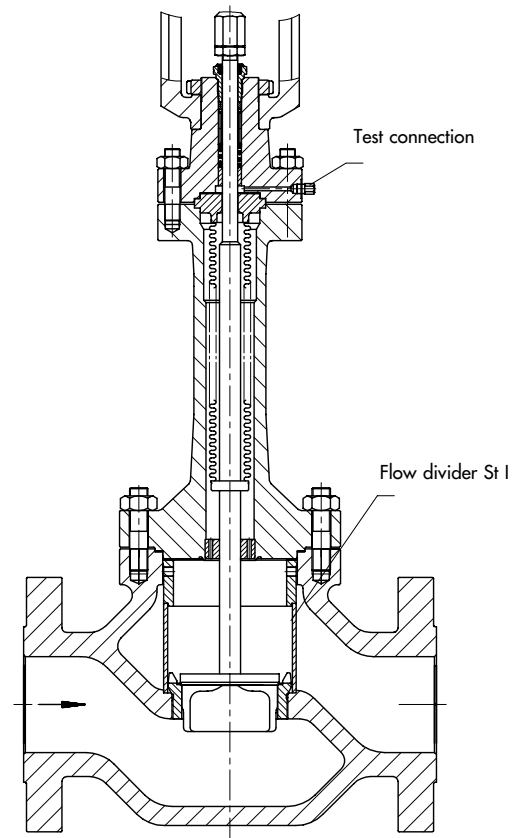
· Type 3251 Globe Valve with St I Flow Divider and additional metal bellows seal with test connection
